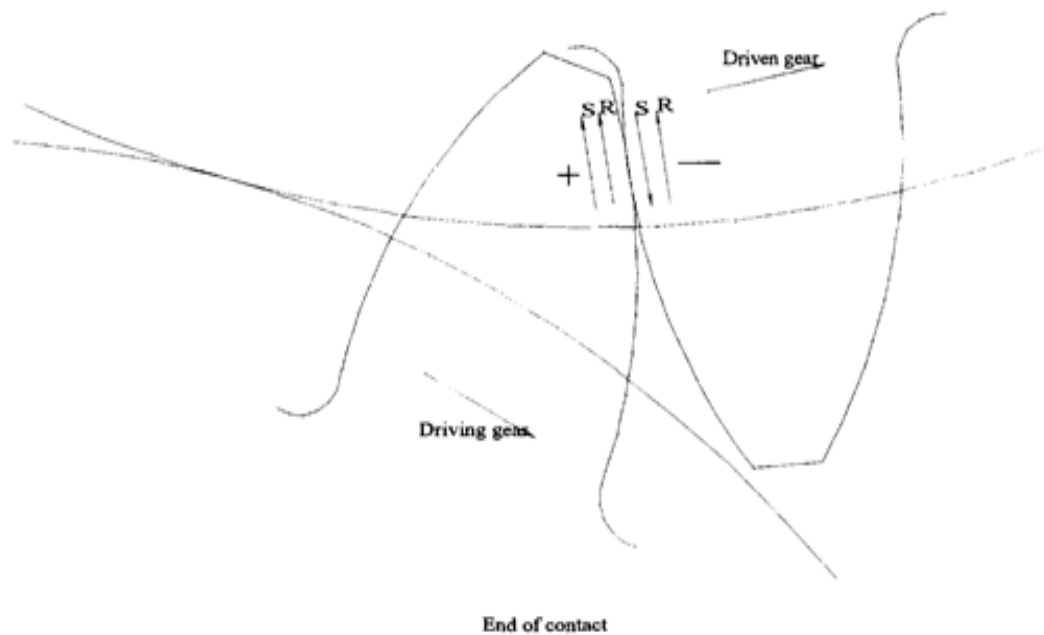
Combination of sliding and rolling in gear teeth at the end of contact[5]
